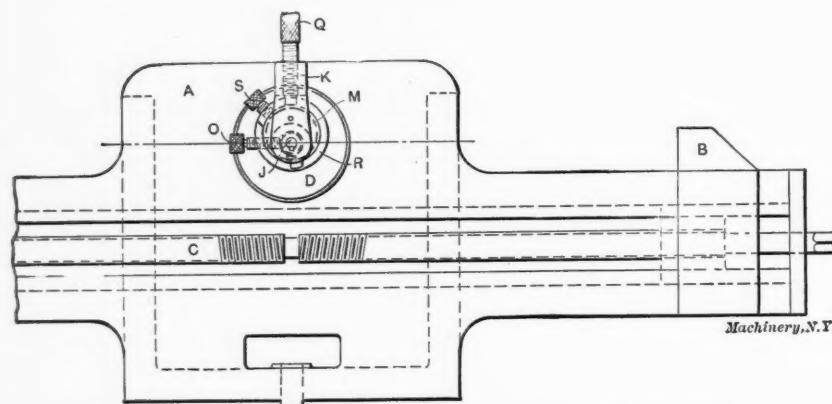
Face View of Attachment showing Vise Jaws for Holding Work.
